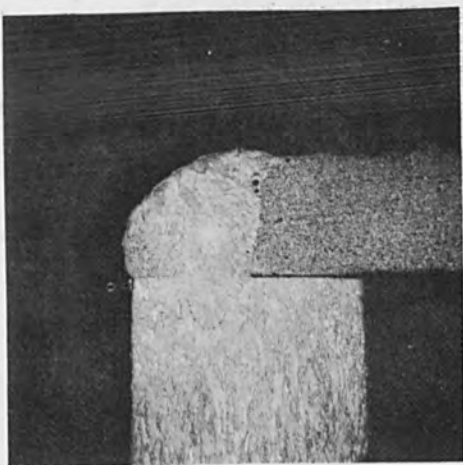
Photomicrograph (50x) of emitter-to-manifold weld.
